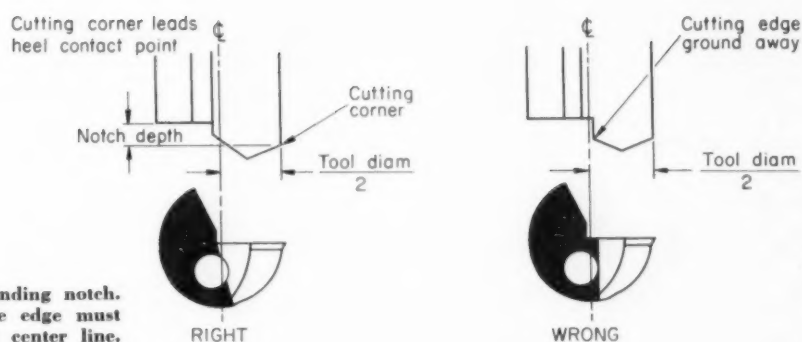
Grinding notch. Inside angle edge must extend past center line.
